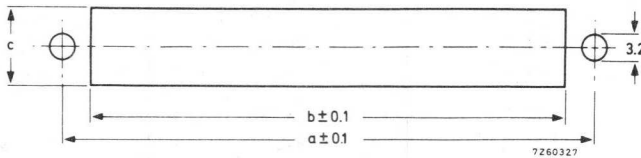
Panel mounting; for dimensions a and b, see Table 2.
